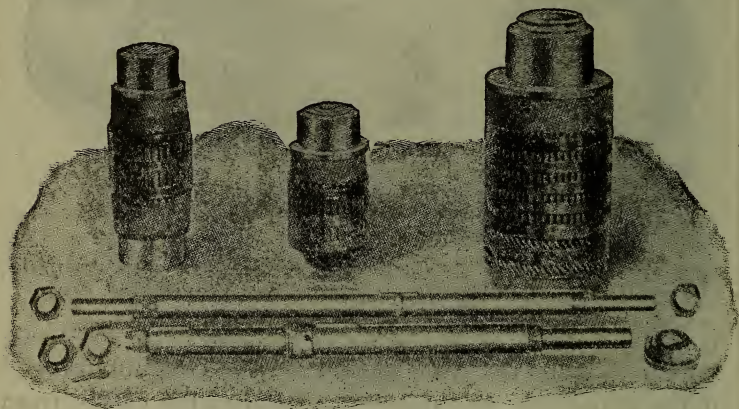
ARMATURE SHAFTS AND NUTS OF GENERATOR AND BUCKER, SHOWING SPIDER AND REMOVABLE SHAFT CONSTRUCTION.
